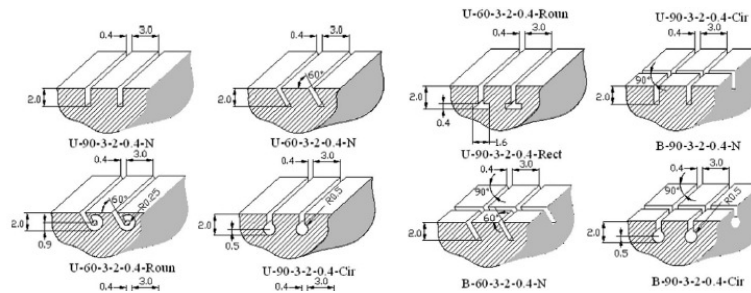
Surface structures with parallel or orthogonally intersecting tunnels and different cavity structures at tunnel base. Das et al., (2009)
